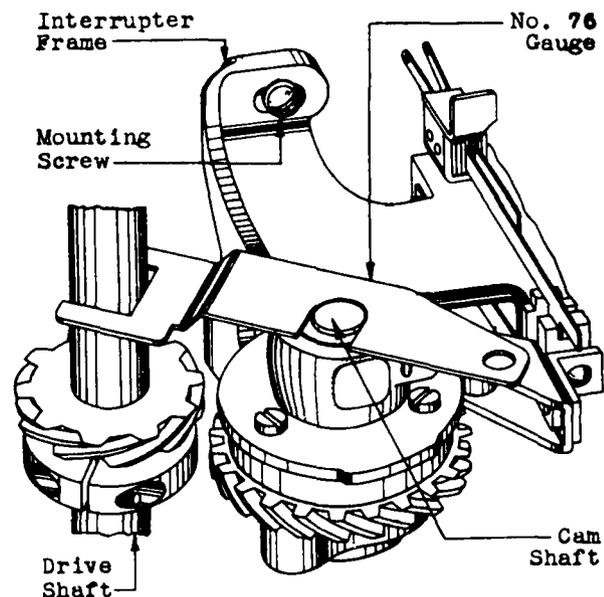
Method of Locating Driving and Cam Shaft Gears
